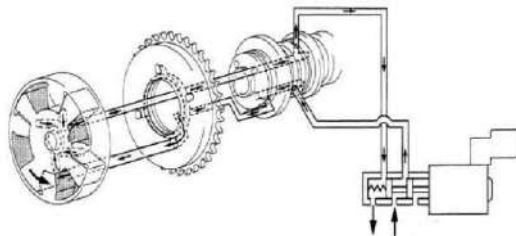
System Operation *VVT-i* when turning camshaft towards later valve opening
